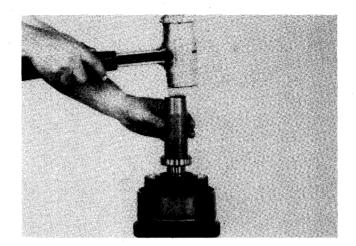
Install clutch gear outer bearing. NOTE: Outer bearing has a shield in it, this shield must be down.
